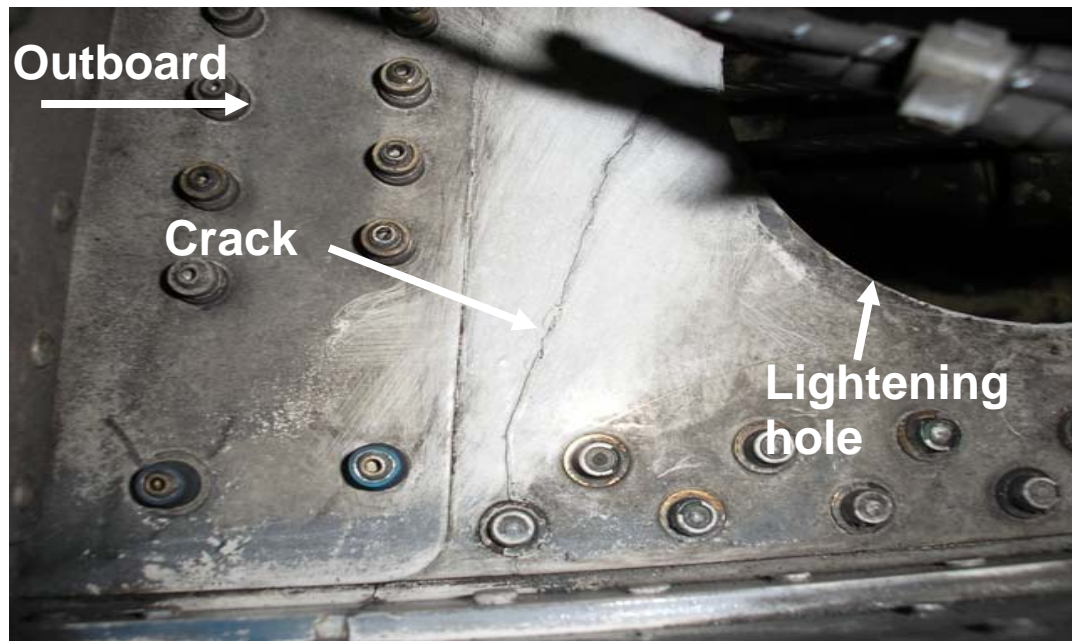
Closeup view of R/H wing rear spar web crack at BL 114 area looking forward (The inboard flap is removed in this figure, but removal of the flap is not required to do the inspection).
